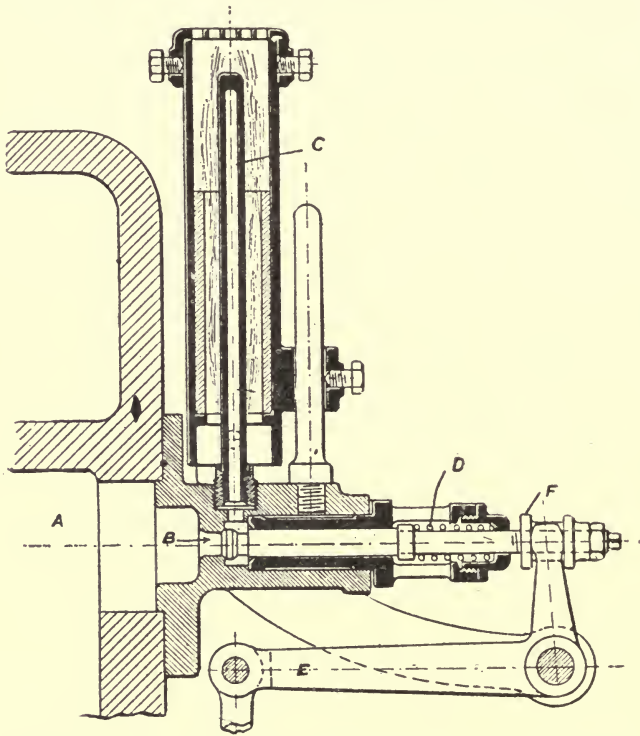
HOT TUBE IGNITER WITH TIMING VALVE.
